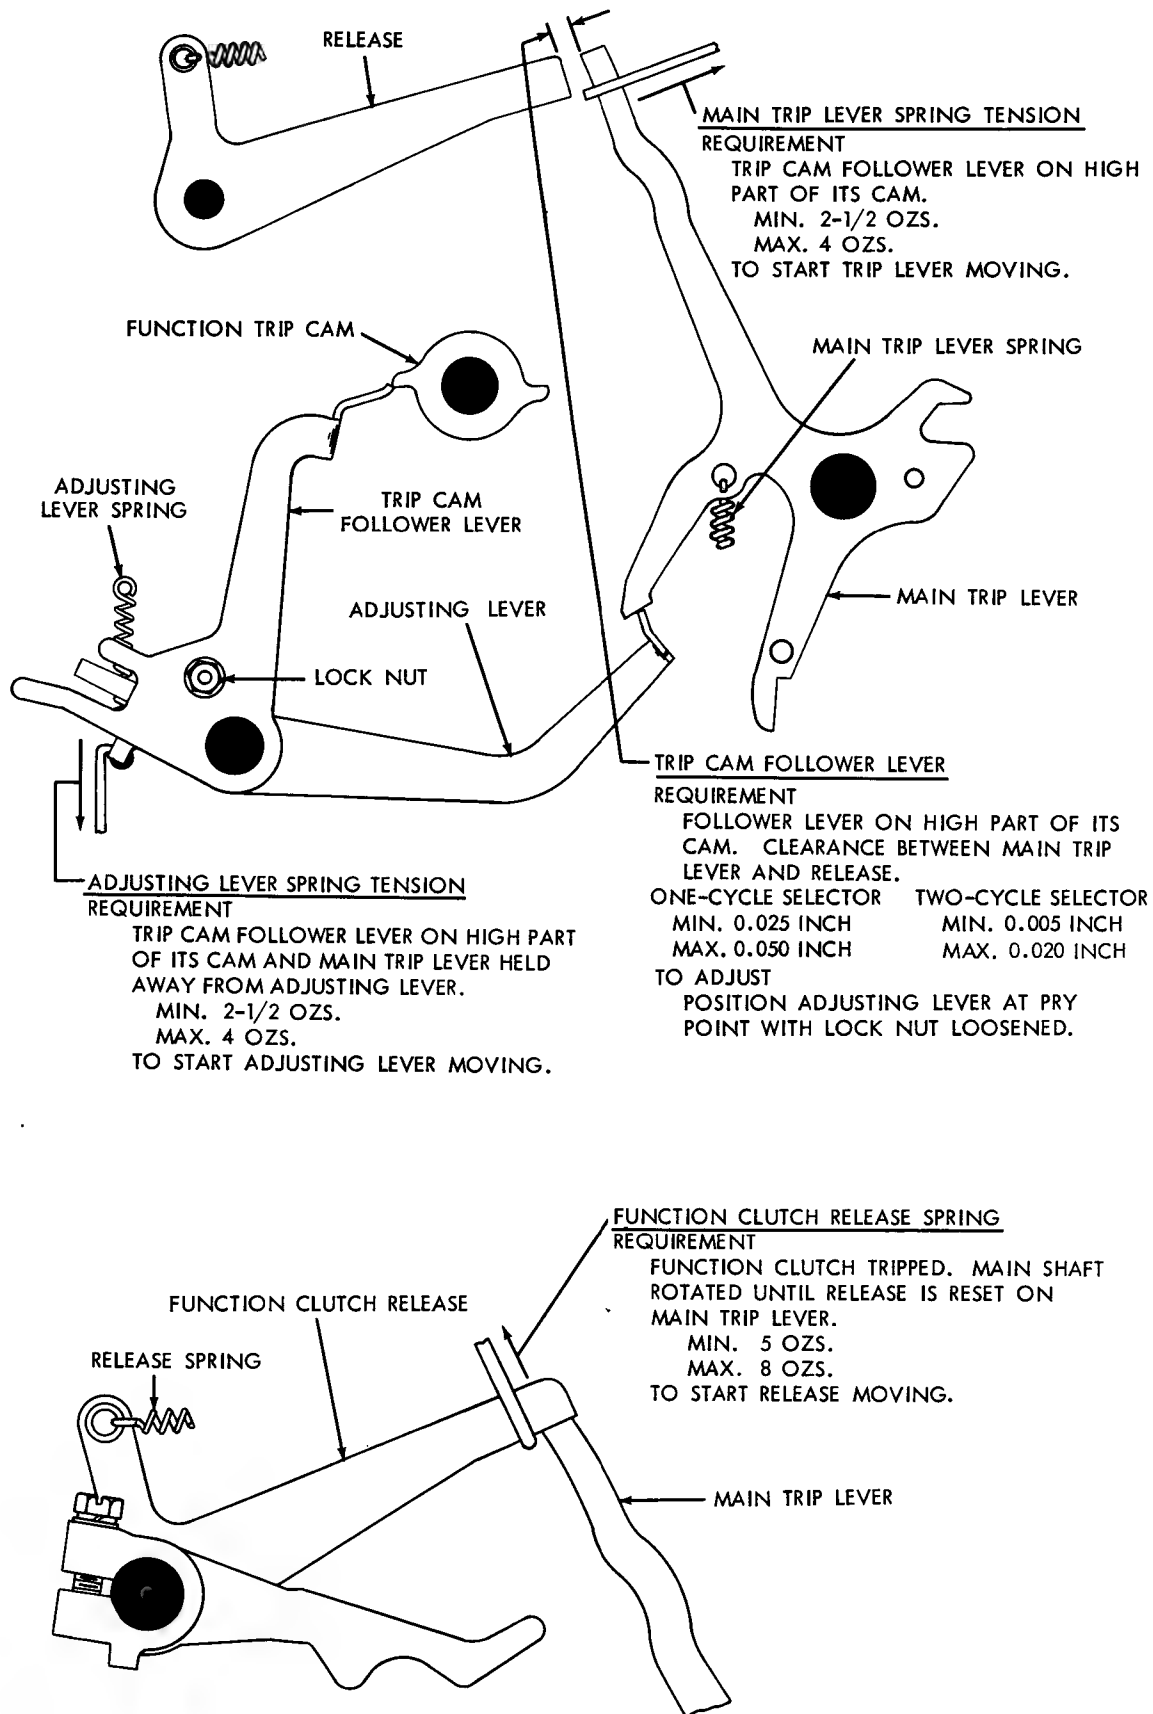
FUNCTION CLUTCH TRIP MECHANISM
